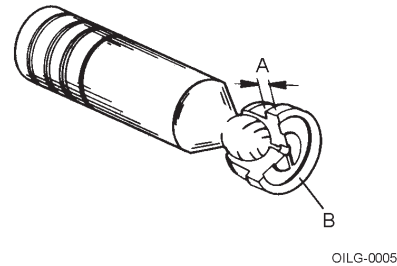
Piston and Shoe Inspection (5V-12015-L)
